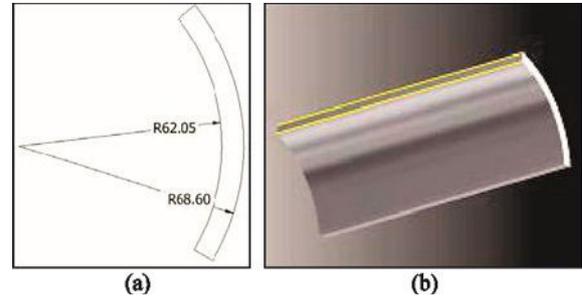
(a) Dimensions of the cross section; (b) sketch in 3D.
